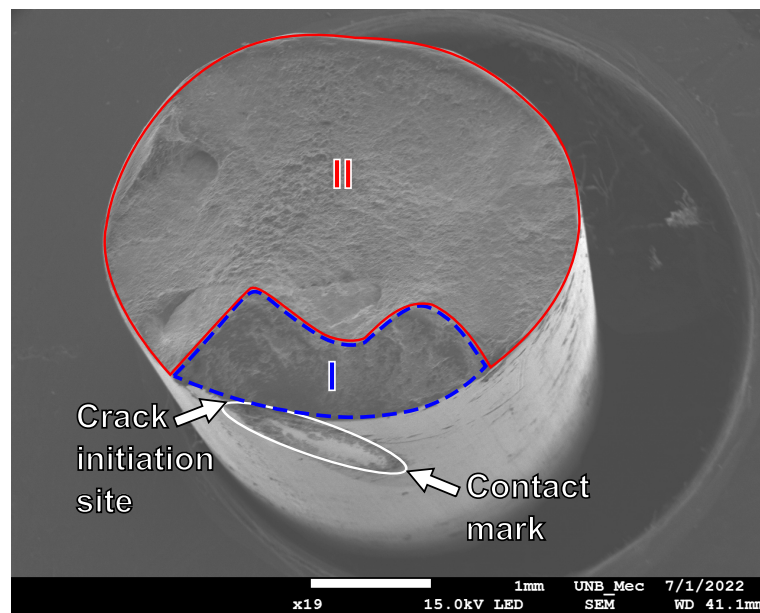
Fracture surface of the fretting wire specimen F09 (refer to Table 3.3).
